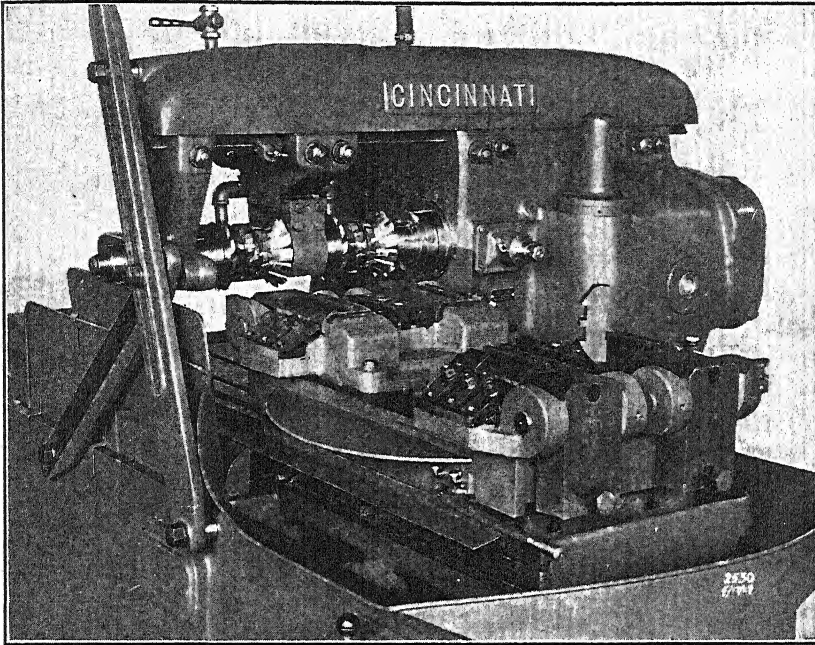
An Indexing Fixture with Work Arranged in Two Groups Abreast for String Milling on a Cincinnati 5-48 Plain Hydromatic Milling Machine.
